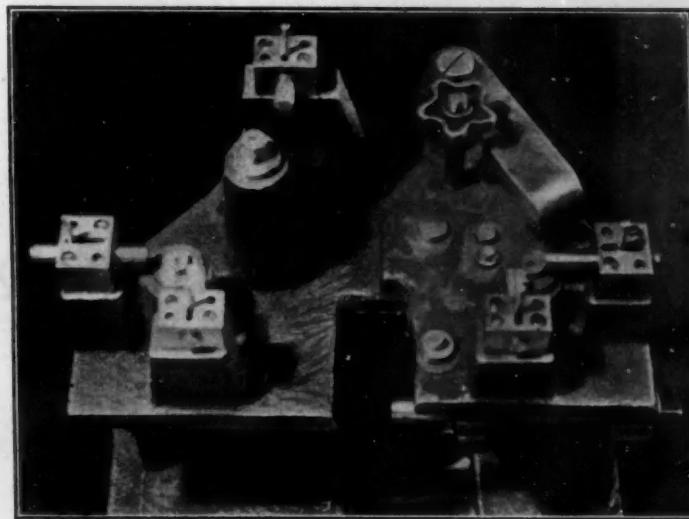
THE FIXTURE ILLUSTRATED IN FIG. 2 WITH PUMP REMOVED
